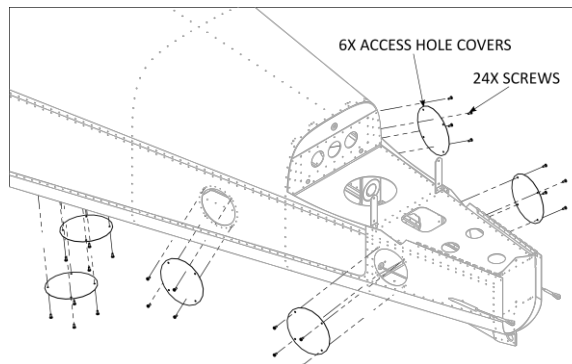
Rear-outer fuselage access hole cover removals.
